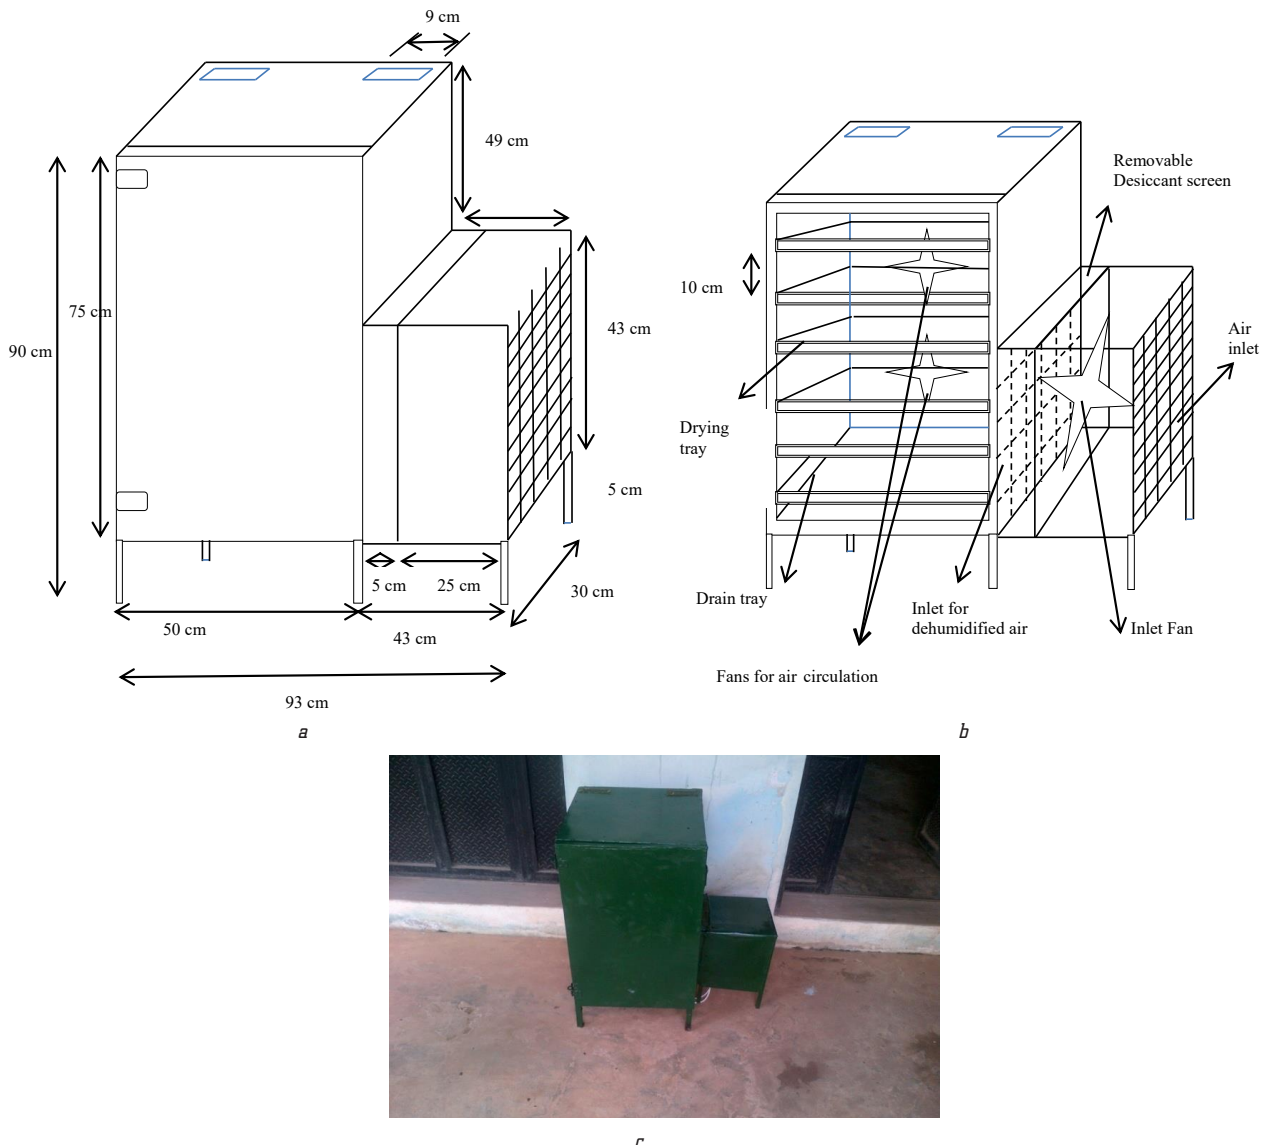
Desiccant dryer: *a* – external dimensions; *b* – internal dimensions; *c* – exterior view
